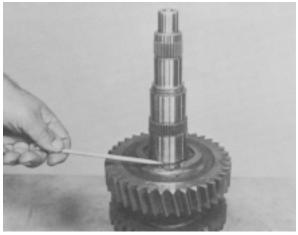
Separate split ring from groove in mainshaft. Remove split ring halves and lock ball.
